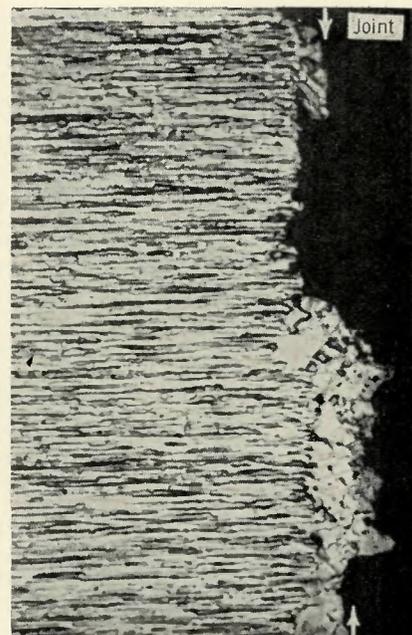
Fracture of hot-isostatic-pressure butt weldment (as ground surfaces) in 2000° F (1093° C) tensile test (specimen 1, Table 4). Etchant: 92 milliliters HCl, 3 milliliters HNO₃, 5 milliliters H₂SO₄ (swab). X500
